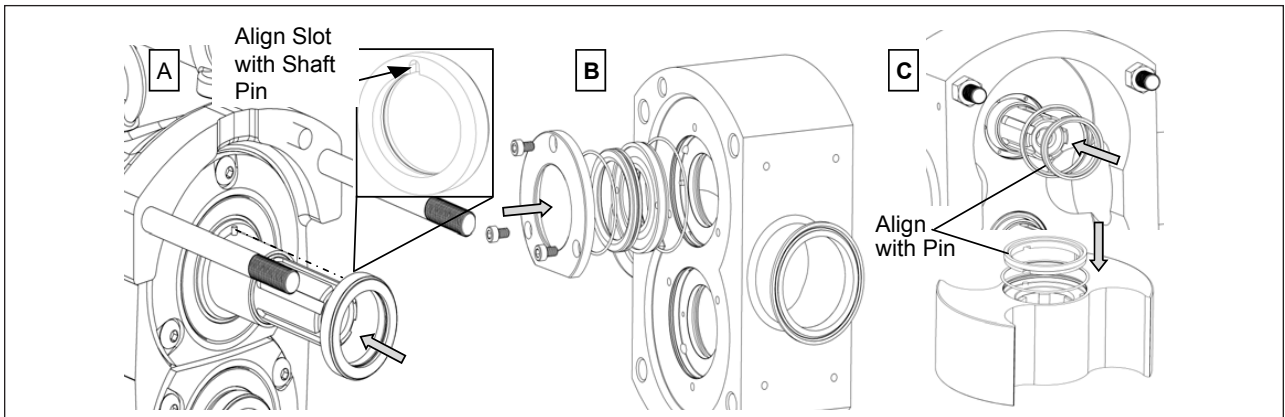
Mechanical Seal with Flush (Lip Seal)
